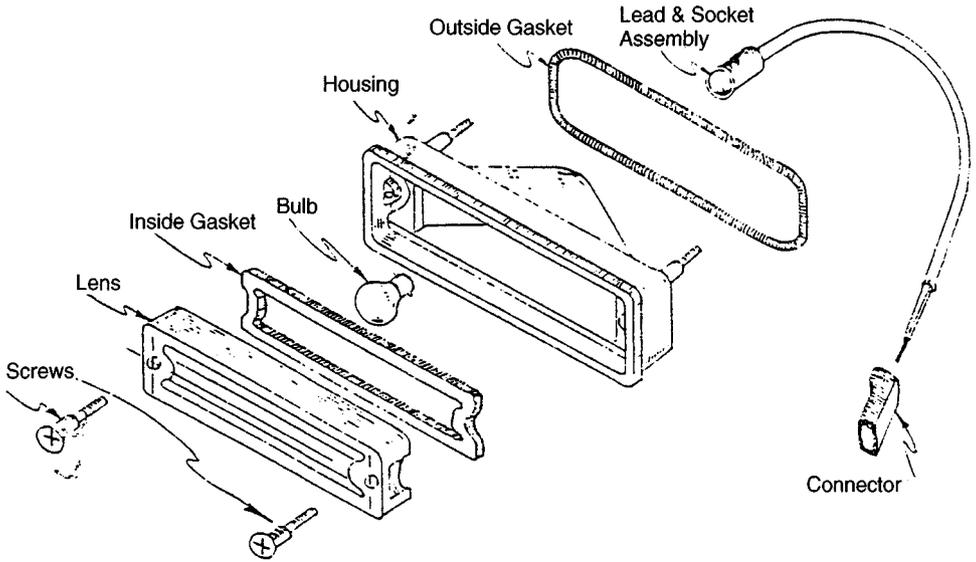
Automobile back-up light assembly. (From Ref. 39.)
